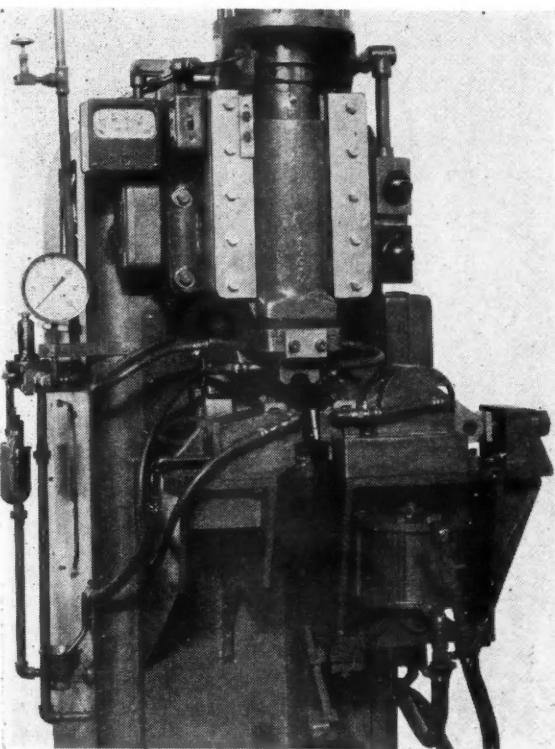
Semi-automatic milling machine, set up for milling a brace bar
